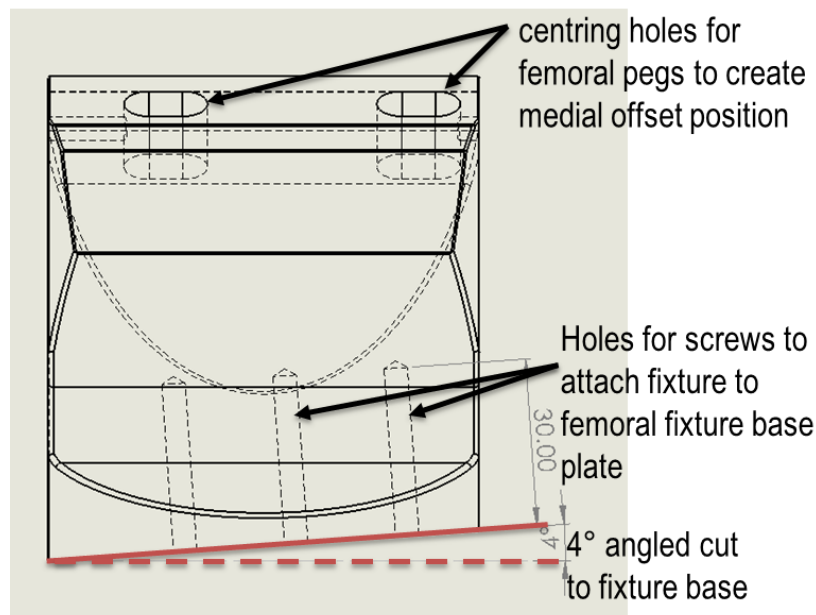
4° varus alignment femoral fixture drawing with adapted base, base plate screw holes and femoral peg centring holes
